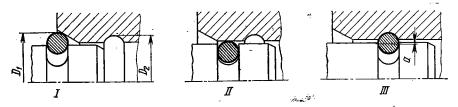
Locking by spring ring placed in shaft groove I, II, III—assembly sequence
